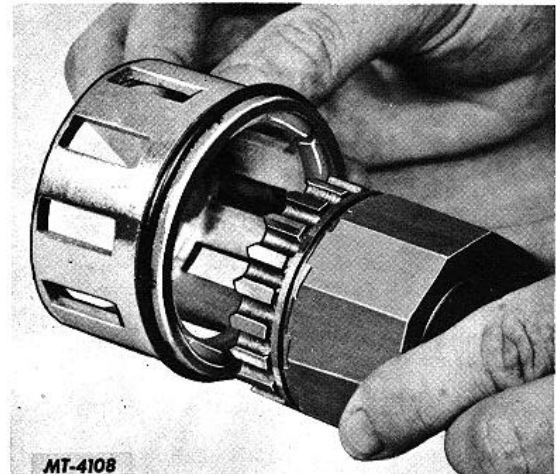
Separating Axle Shaft Hub from Roller Cage
